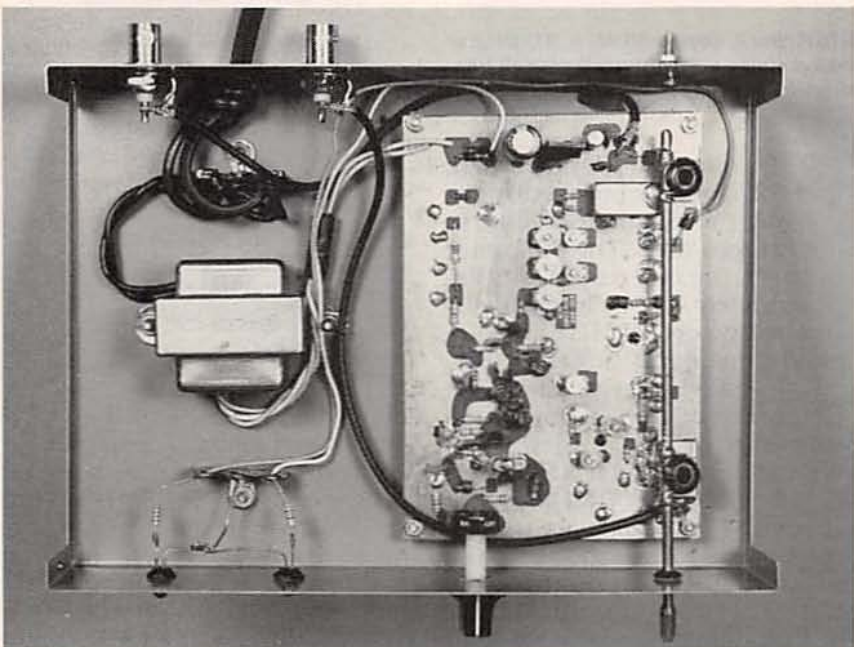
THE INSIDE OF THE PROTOTYPE UNIT. The converter board can be mounted in a case along with a 12-volt transformer.
